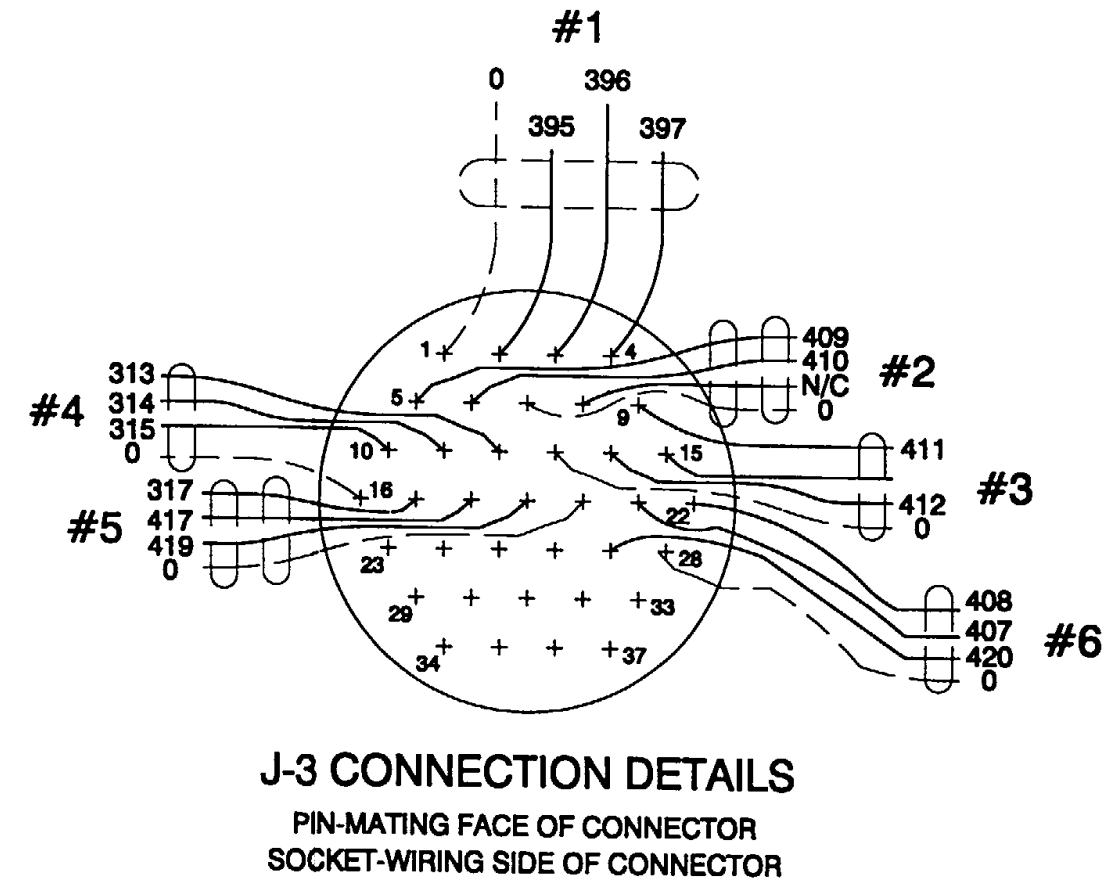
Port Receptacle "A6" Assembly. (Sheet 2 of 2).
